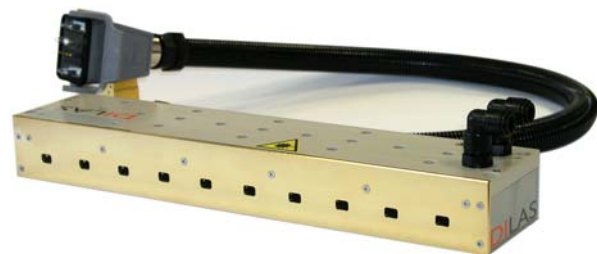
Customized diode laser set up for simultaneous welding of 10 welding spots. Each laser module contains 10 conduction cooled laser diodes with maximum output power of 50 W each on a water-cooled heat sink.
